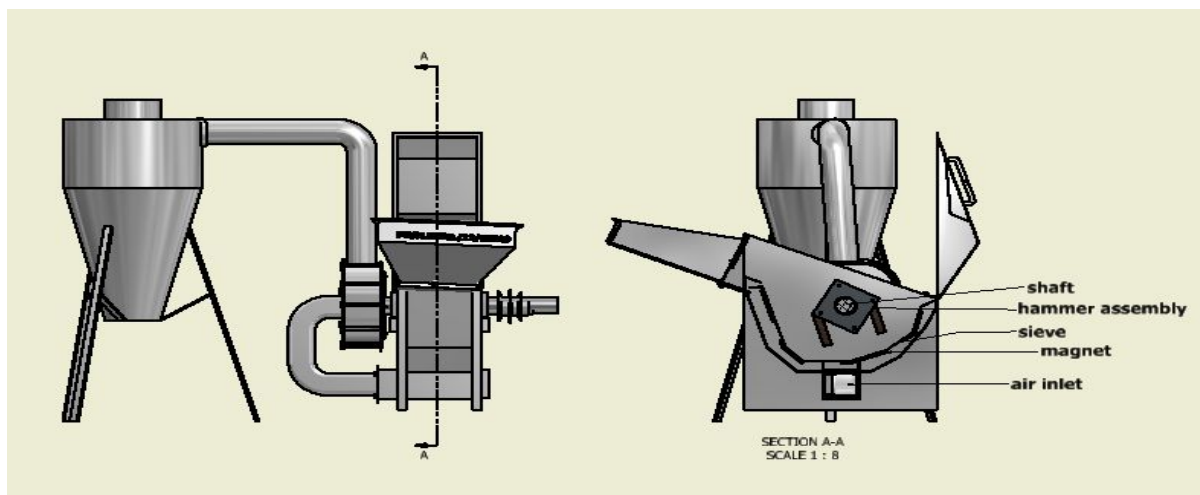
Cross section A-A of the Magnetic Sieve Grinding Machine
